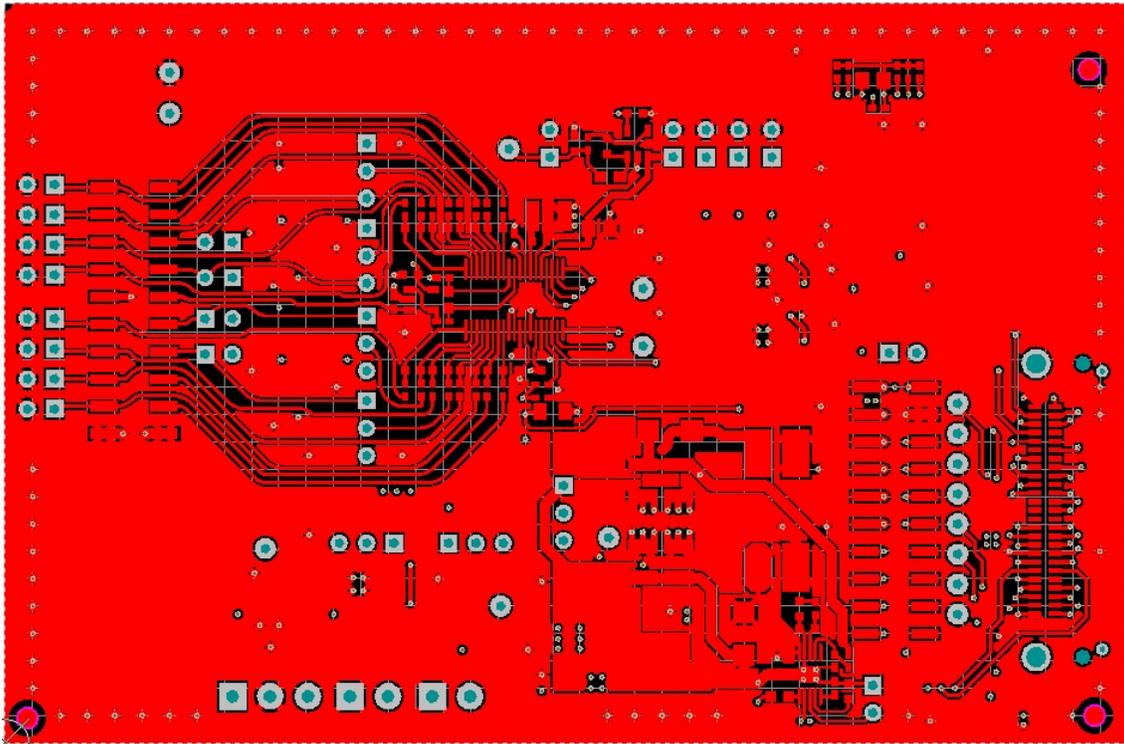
ADS86xxEVM PCB: Top Layer (L1)
